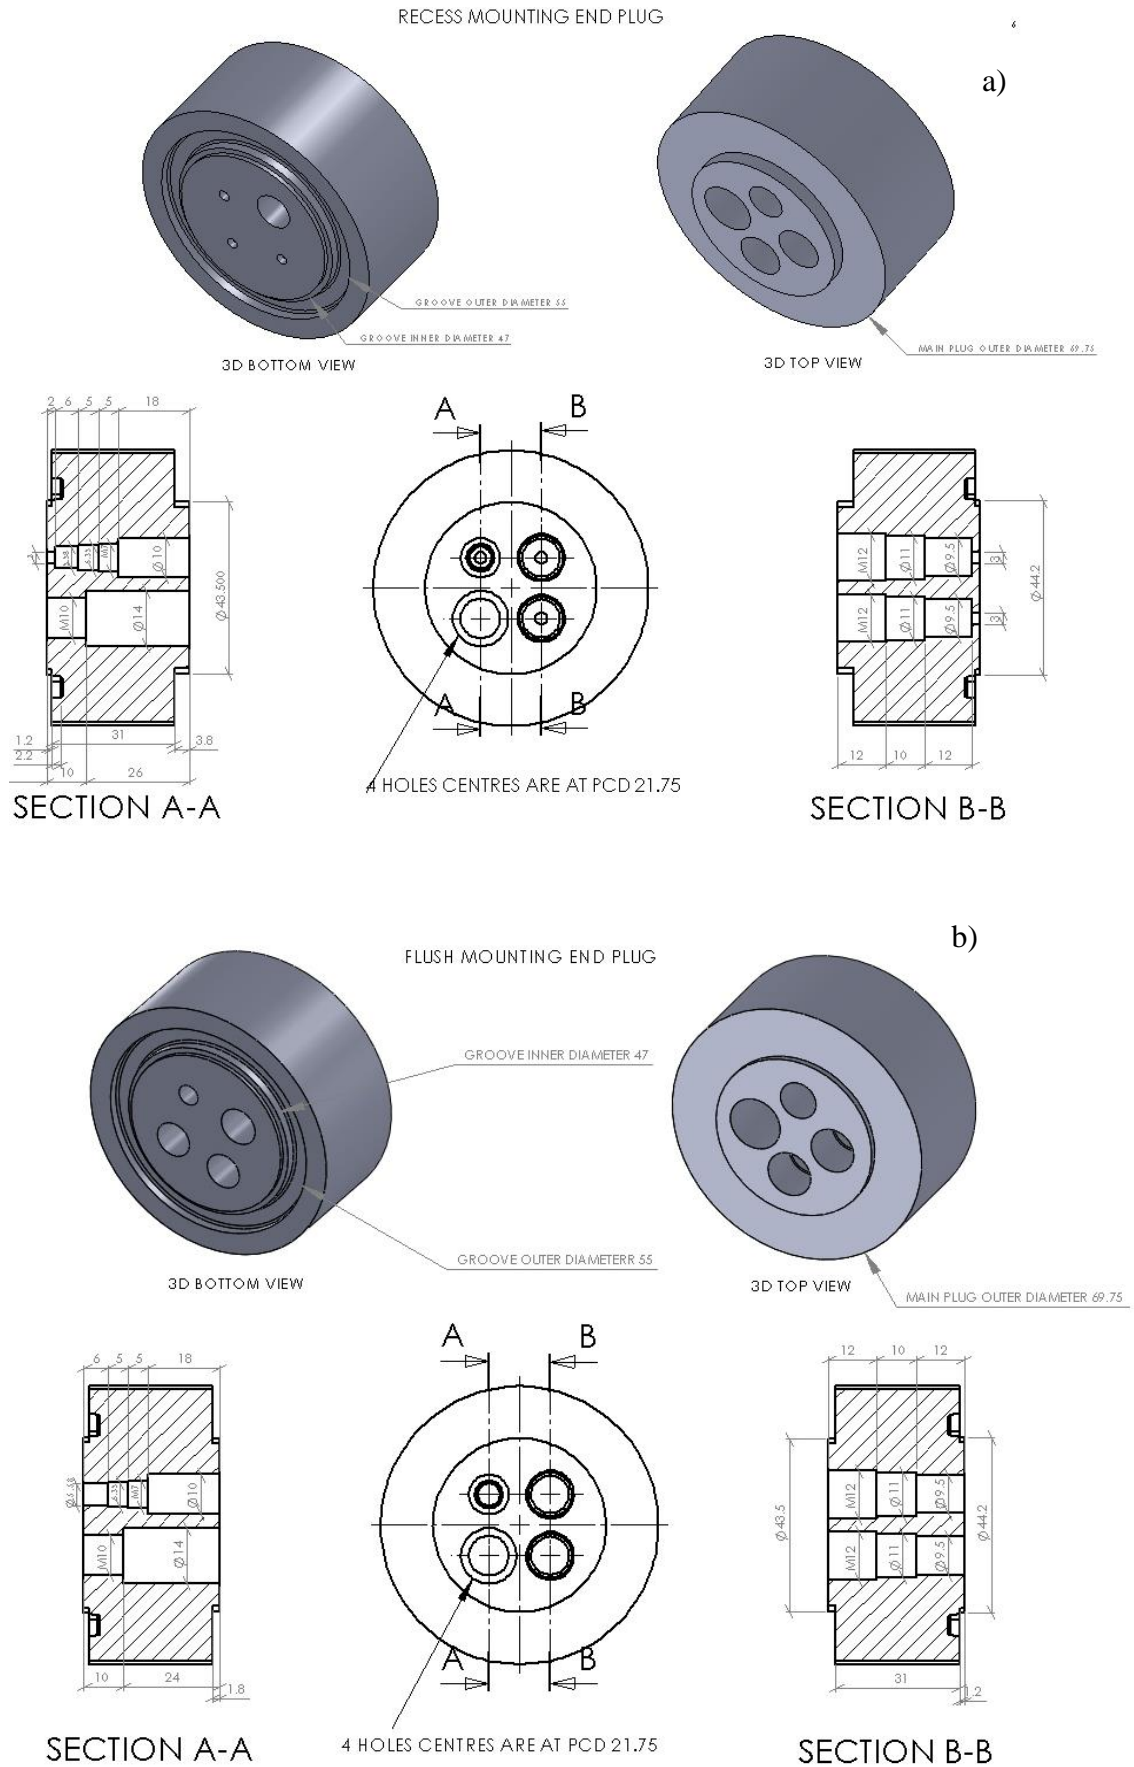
SolidWorks model of custom machined multi a) recess and b) flush mounted dynamic pressure transducer end plugs.
